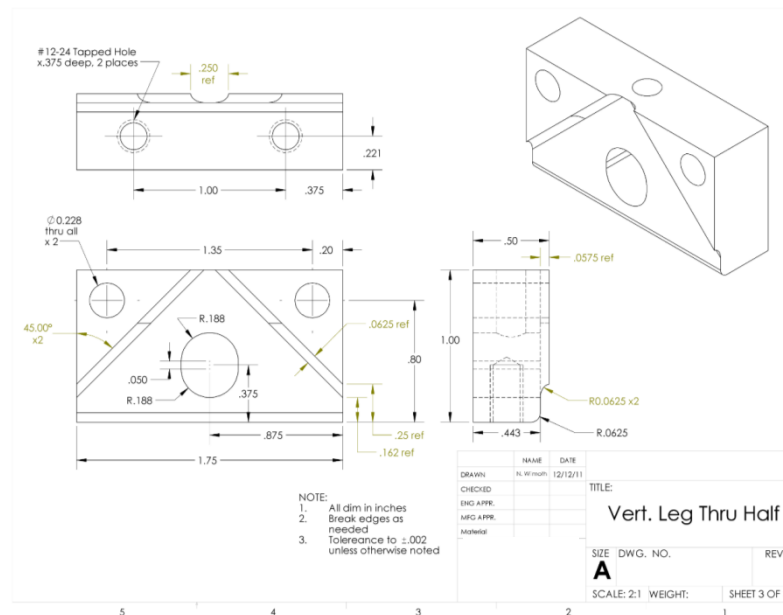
Vertical Specimen Fixture Half without Upper Threaded Holes
